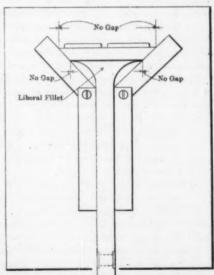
Cone type of valve with a lib-eral fillet between head and stem which prevents warping with heat changes
